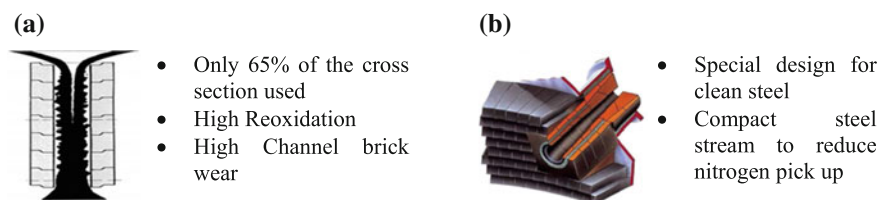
a Cylindrical tap hole design b ISOJET C tap hole design
